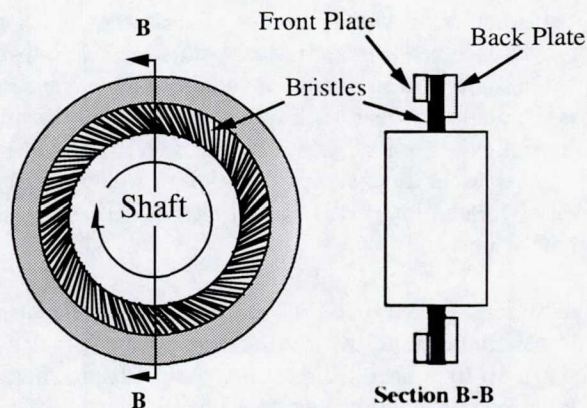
Schematic of a typical brush seal showing front and cross section views.
